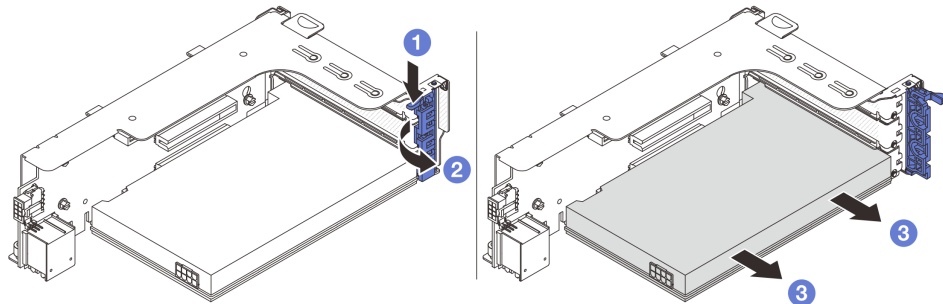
Removing the PCIe adapter from riser 1 or 2 assembly
